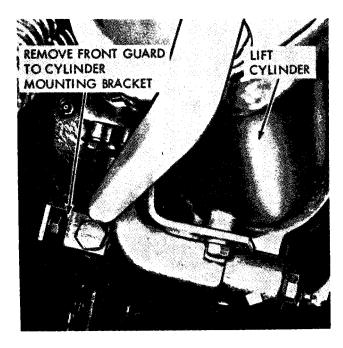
Engine upper guard assemblies, removal and installation (sheet 1 of 3).
